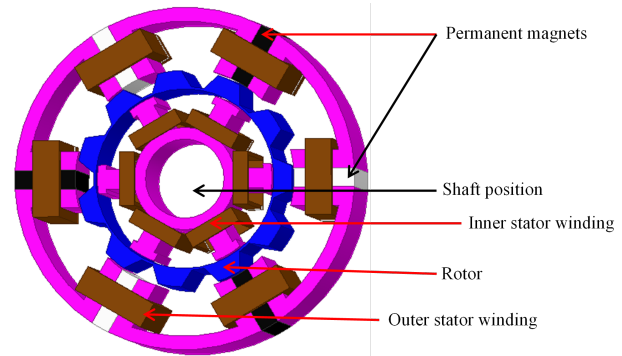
The investigated machine three-dimensional structural plan, 11 poles [21].
